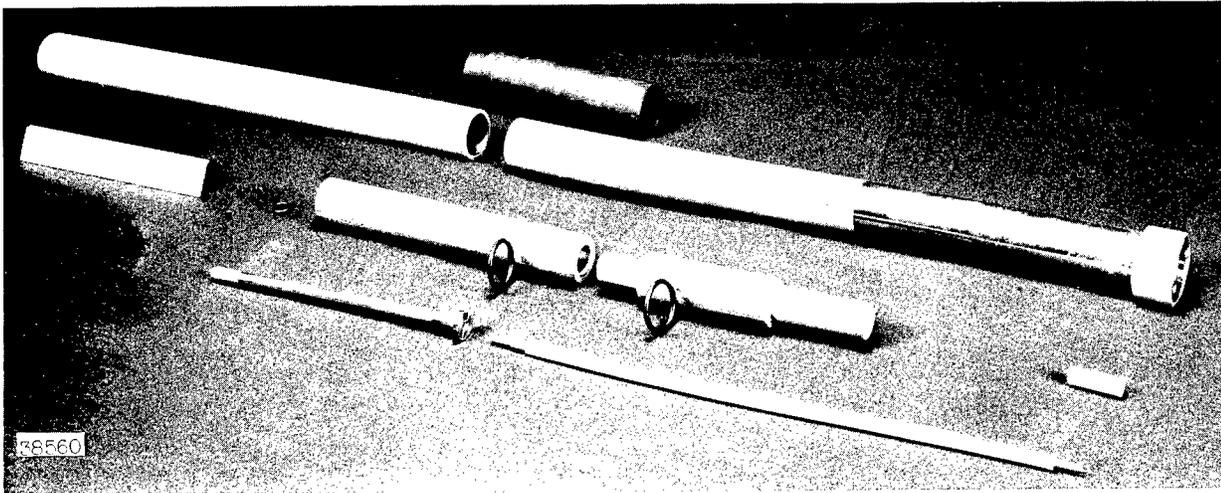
Improved sleeve-stub antenna -- Disassembled view
